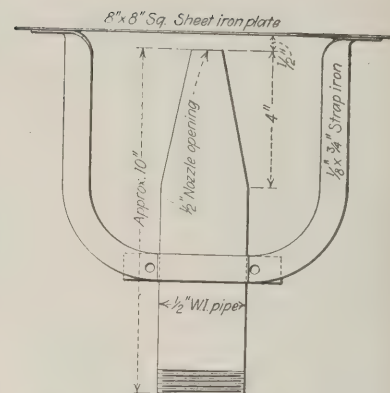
SPRAY HEAD USED IN PROSPECT BREAKER
